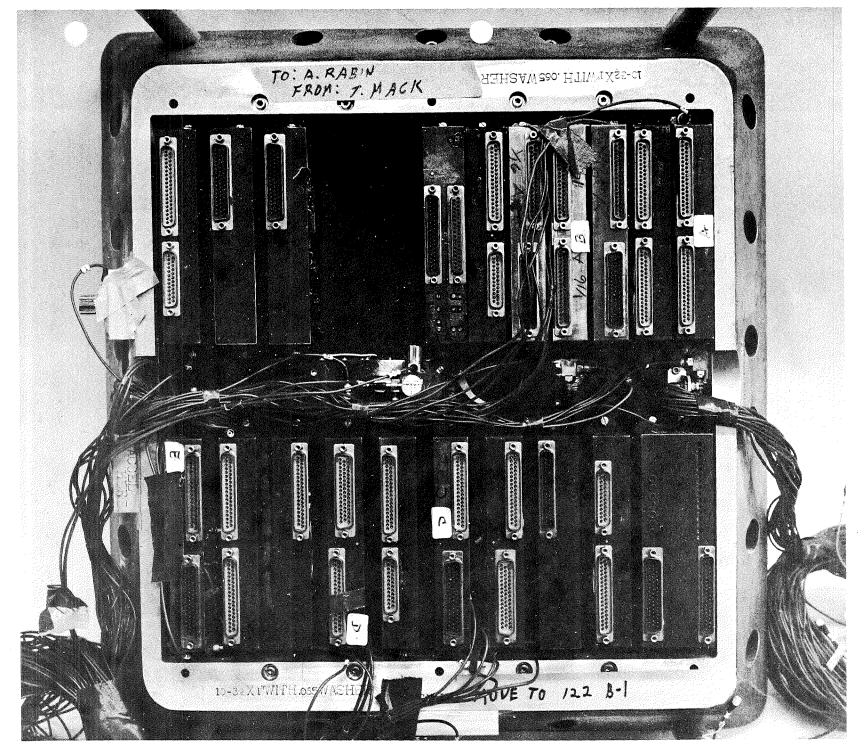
ELECTRONIC ASSEMBLY MOUNTED IN A CONVENTIONAL TEST FIXTURE
